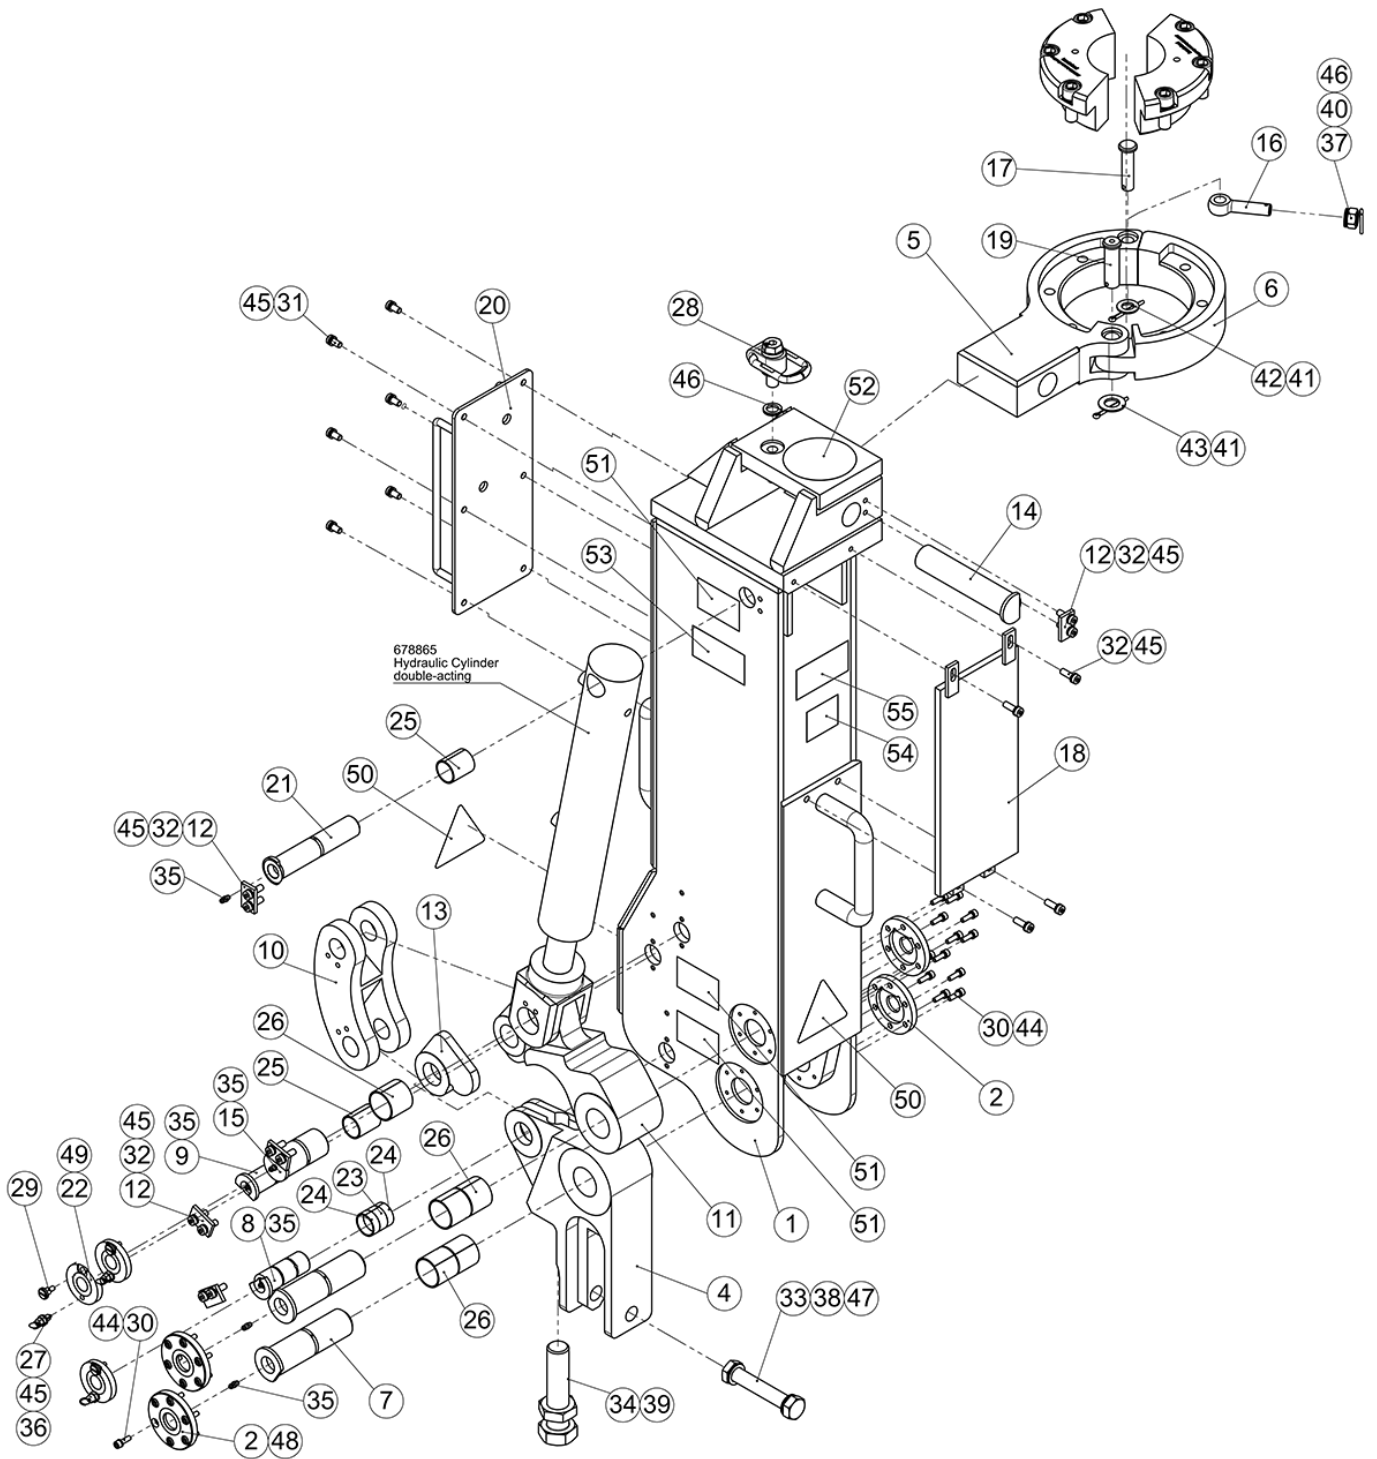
678800 Single Elevator Rotation System Drawing II
